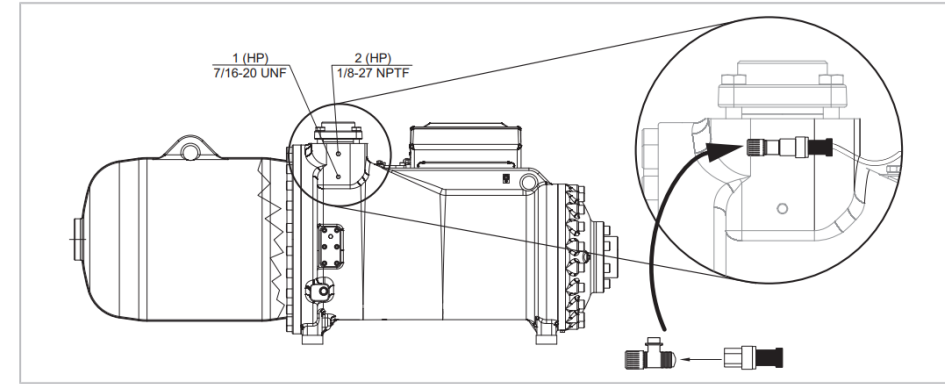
CS.95 compressor: Mounting of the high pressure transmitter
